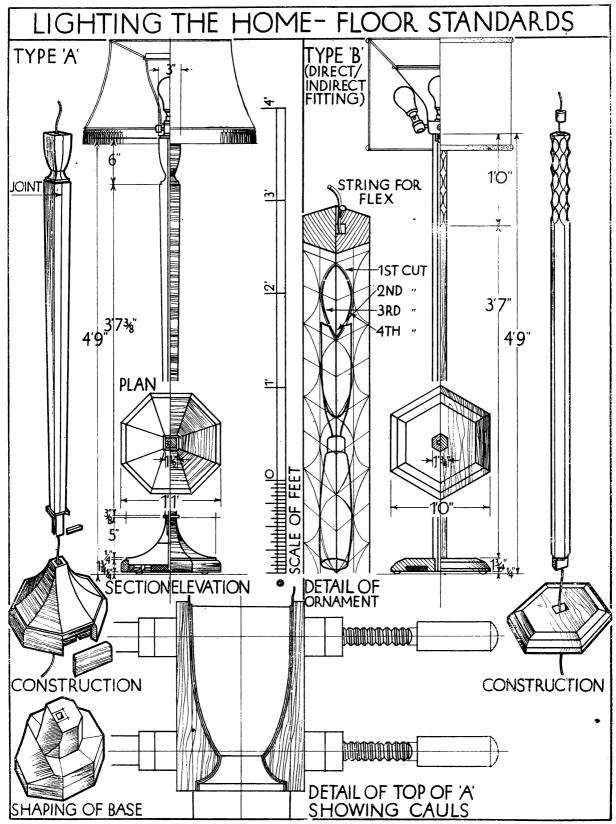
DIMENSIONED ELEVATIONS WITH SCALE, AND DETAILS OF CONSTRUCTION.
